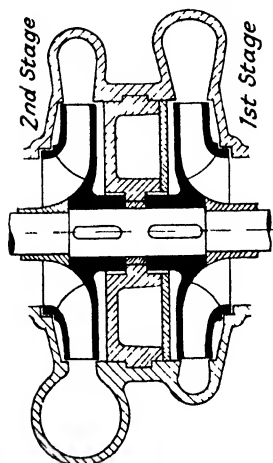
Arrangement of opposed impellers in two-stage pump.
